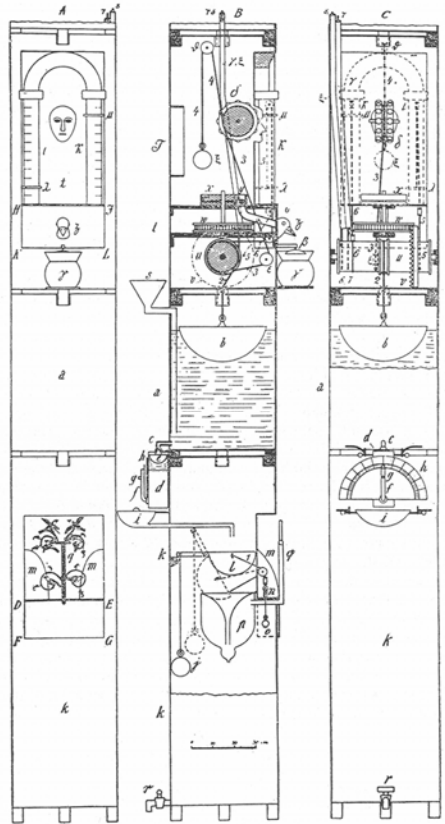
Façade (A), cross section (B) and back view (C) of the water clock of Archimedes
